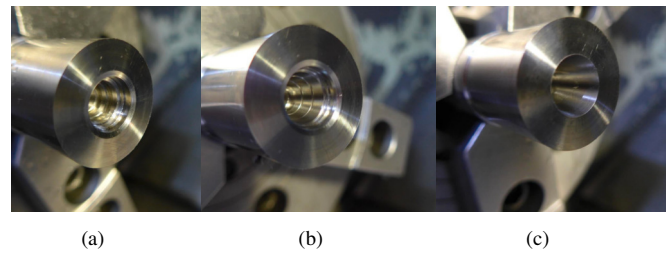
(a) Nozzle inner surface after successive drilling with drill bits of 6, 8, 10, and 12 mm, (b) nozzle inner surface after the first finishing operation, (c) nozzle inner surface after all the finishing operations.
